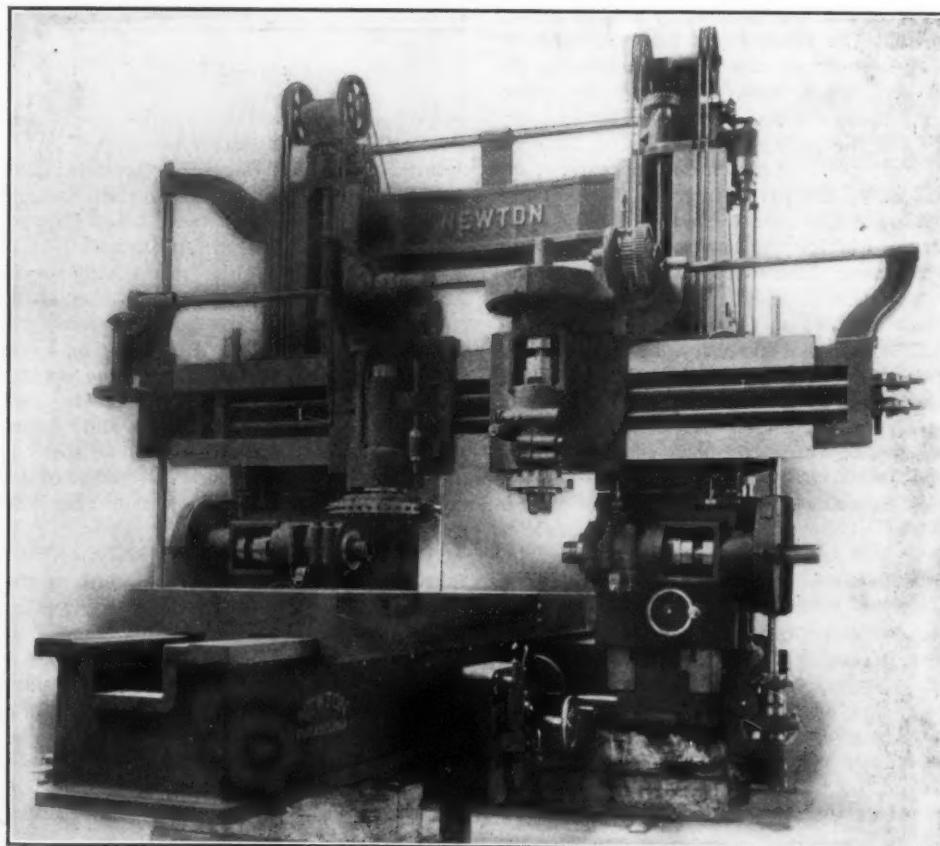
Three-Quarter Front View of the Newton Miller.
